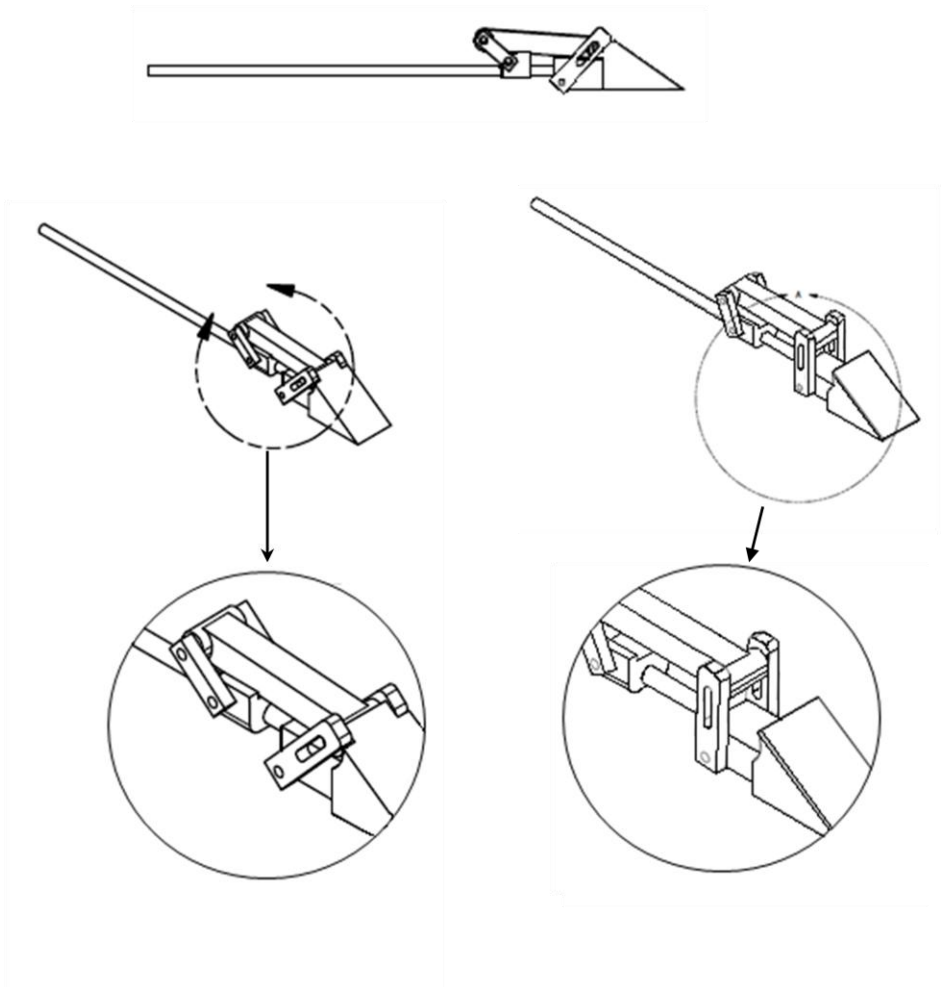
The intial closing mechanism concept utilized a sliding four link assembly.
